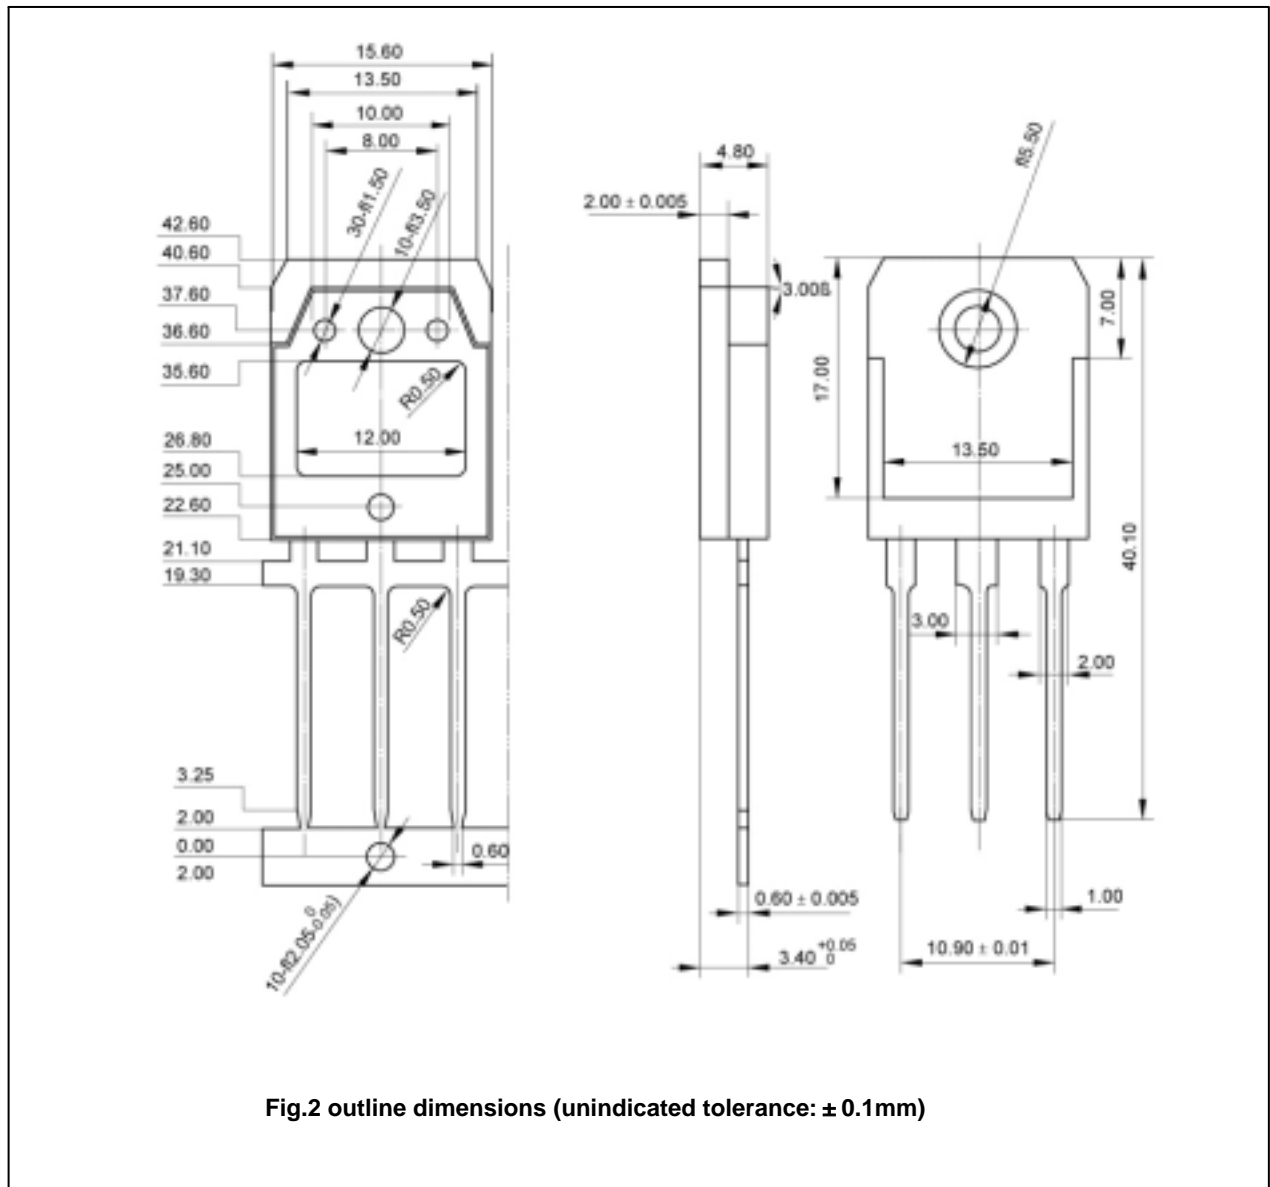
outline dimensions (unindicated tolerance: ± 0.1mm)
